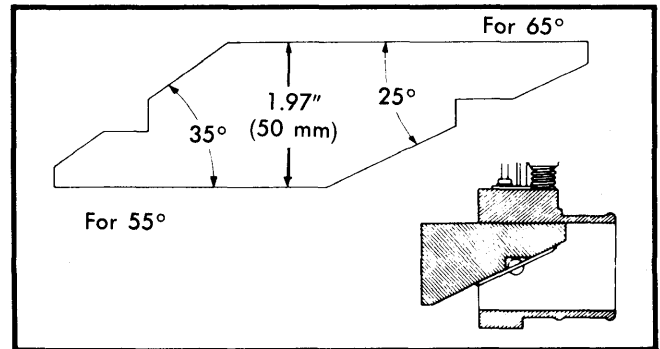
Angle Gauge Dimensions for Adjusting Toyota Throttle Valve Switch
